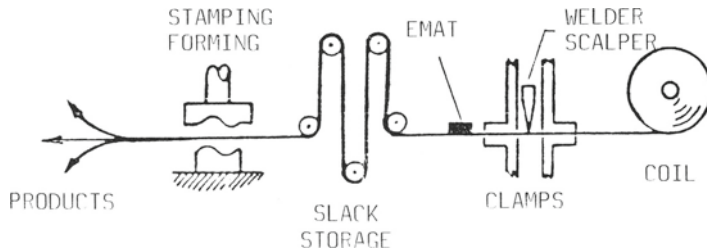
Schematic diagram of a production line in which sheet metal in the form of a coil is converted into products. The left hand side of the diagram operates continuously while the right side must be interrupted to allow the end of one coil to be welded to the start of the next coil.
